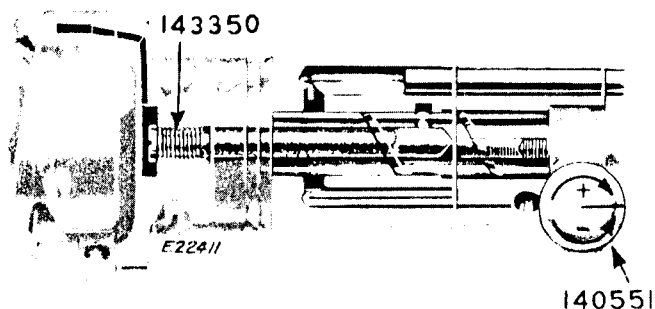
Oil Flow Regulator in Hook Shaft Bushing
